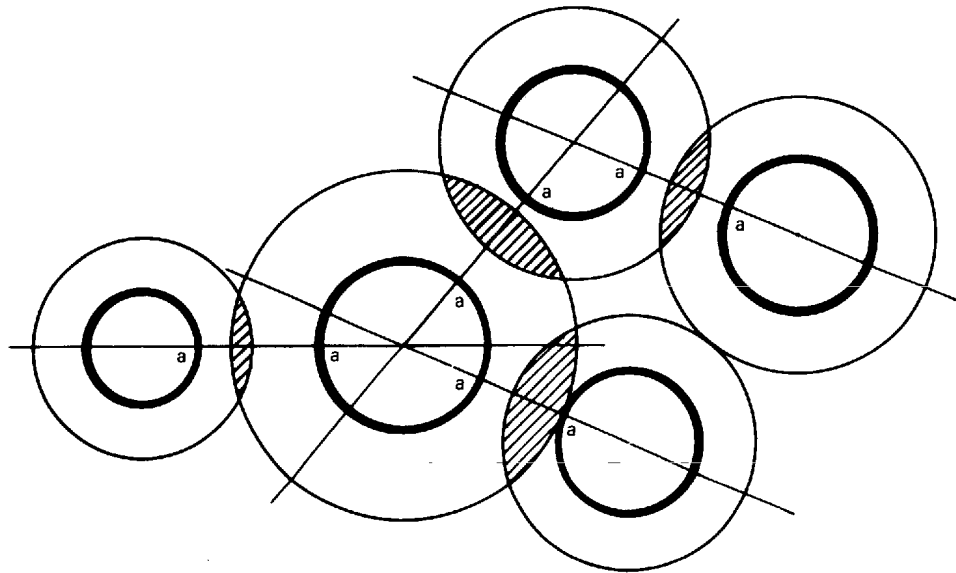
NOZZLE DIMENSIONS
